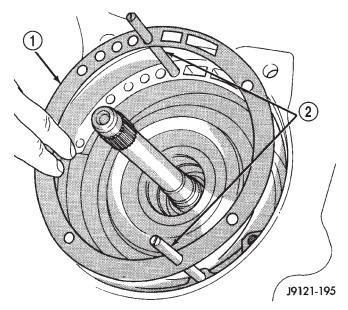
Installing Pilot Studs And Oil Pump Gasket 1 – OIL PUMP GASKET
